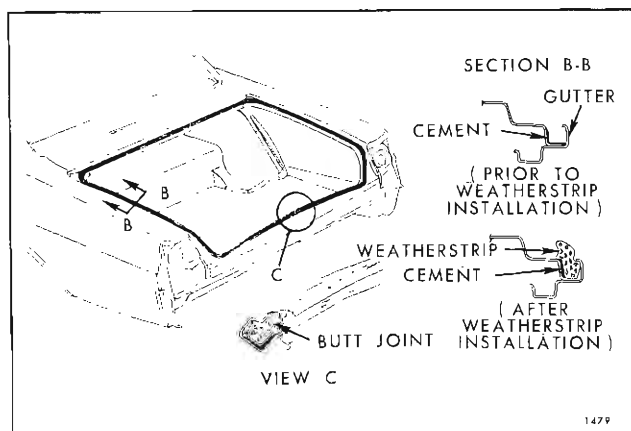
F21—Rear Compartment Weatherstrip Assembly
